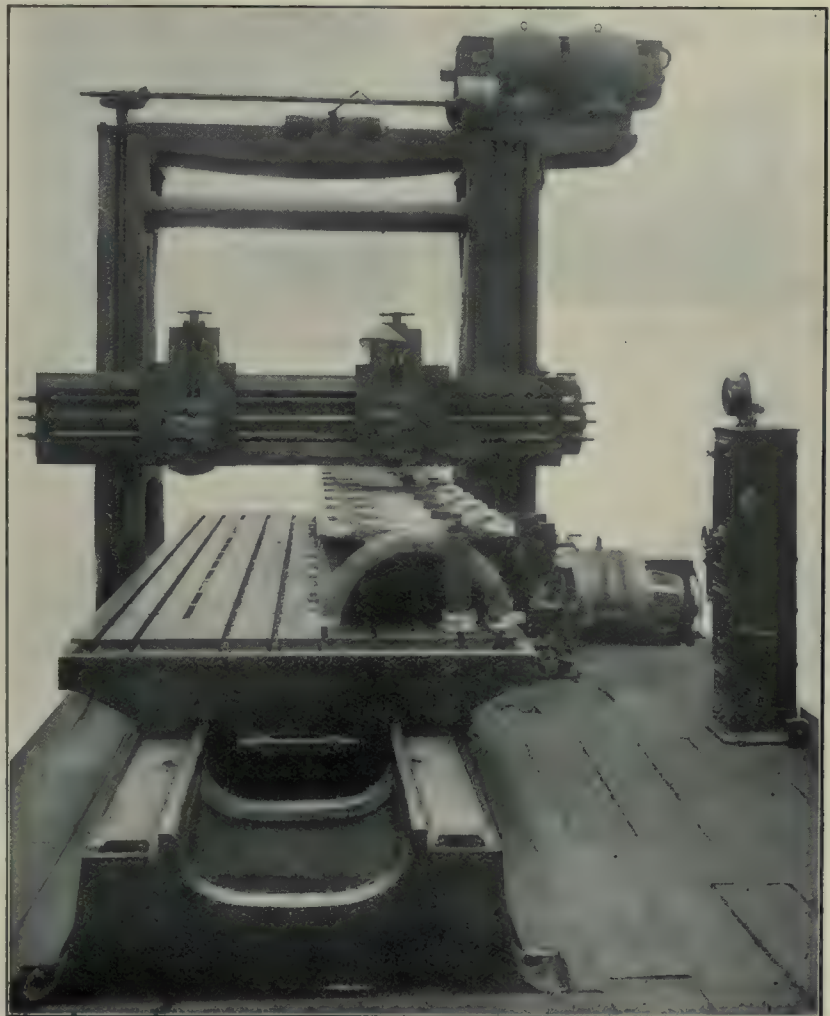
Planing Machine Equipped With Lancashire Electric Drive.
